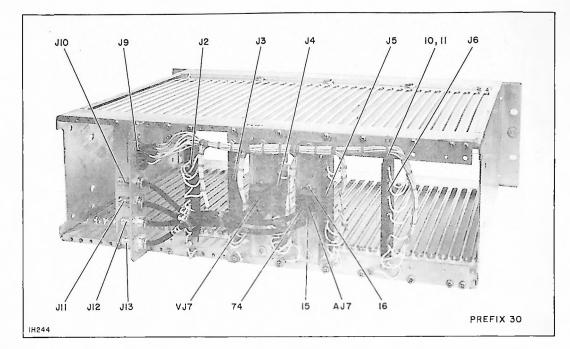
Frame Assembly MI-560595, Rear View - Prefix 30
